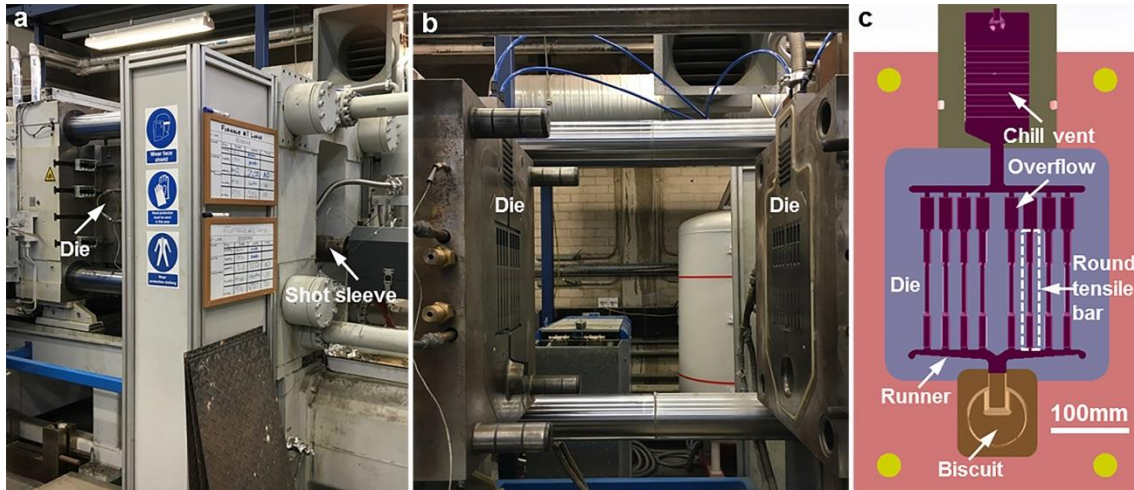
(a) Cold chamber high pressure die casting machine and (b) die-set in the machine, and (c) cross section of die-set showing the round tensile test bars casted by the die.
